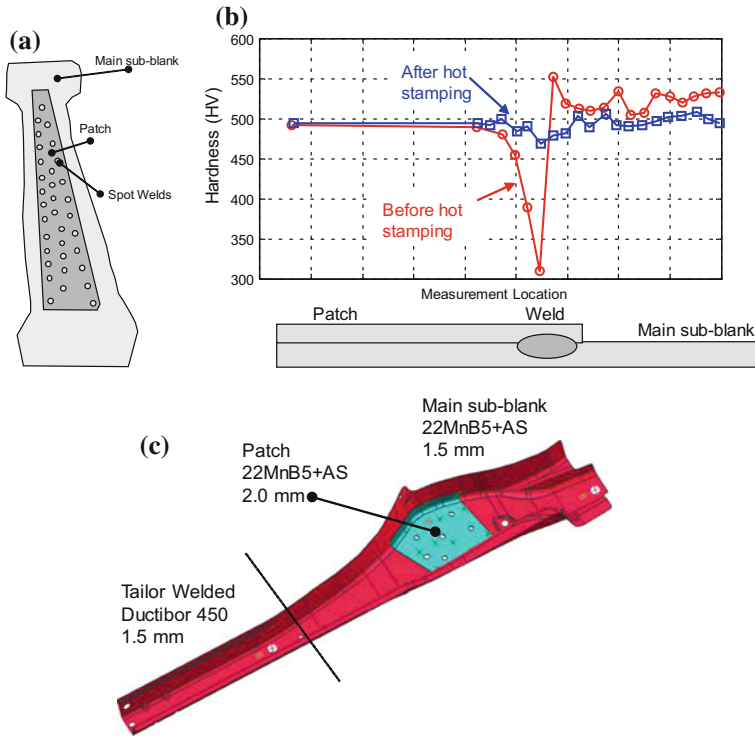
Patchwork blanks: a schematic view of a B-pillar, b hardness profile around a spot weld, before and after hot stamping (re-created after [74]), c rear rail of Fiat Egea/Tipò (courtesy of FCA Turkey)
